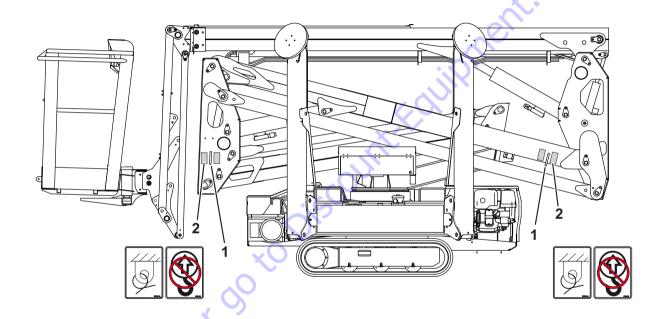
Machine Tie-Down Points (both sides of machine)
